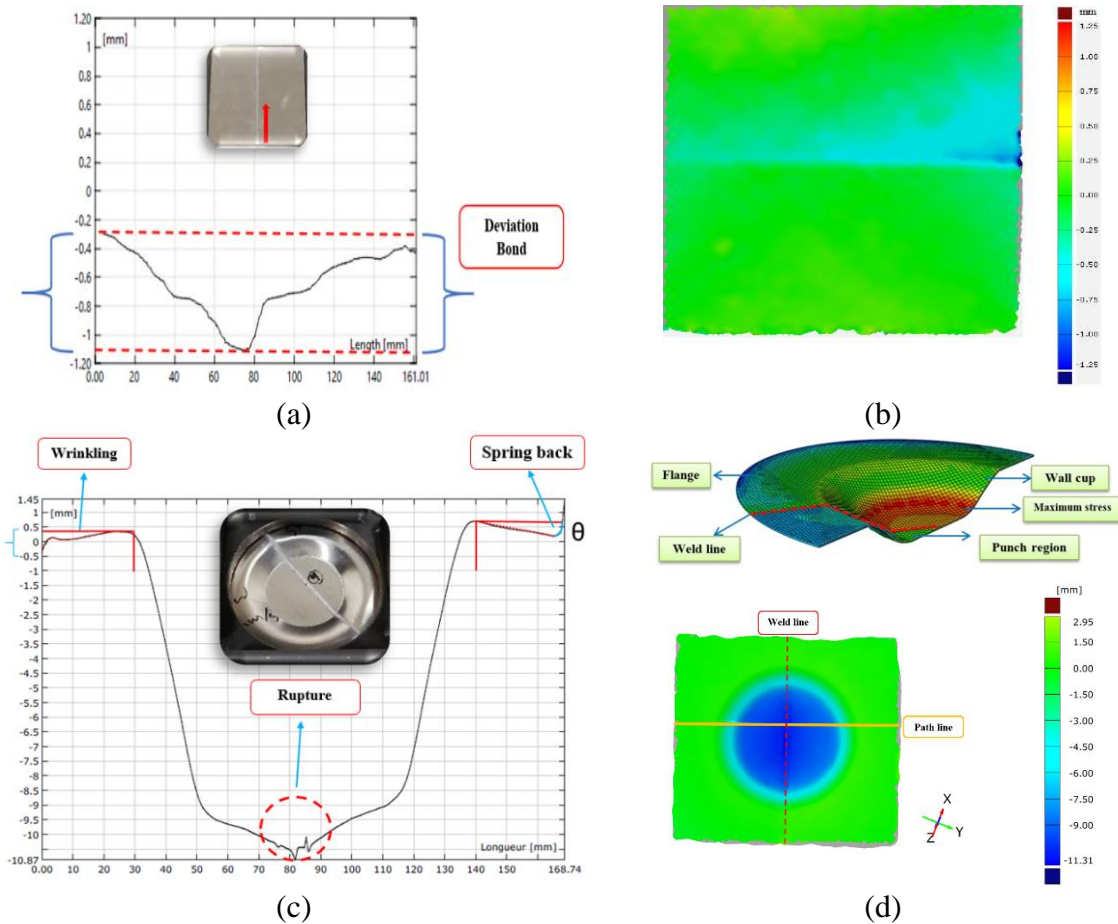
LWBs distortion: a,b) after laser welding c,d) after forming process.
